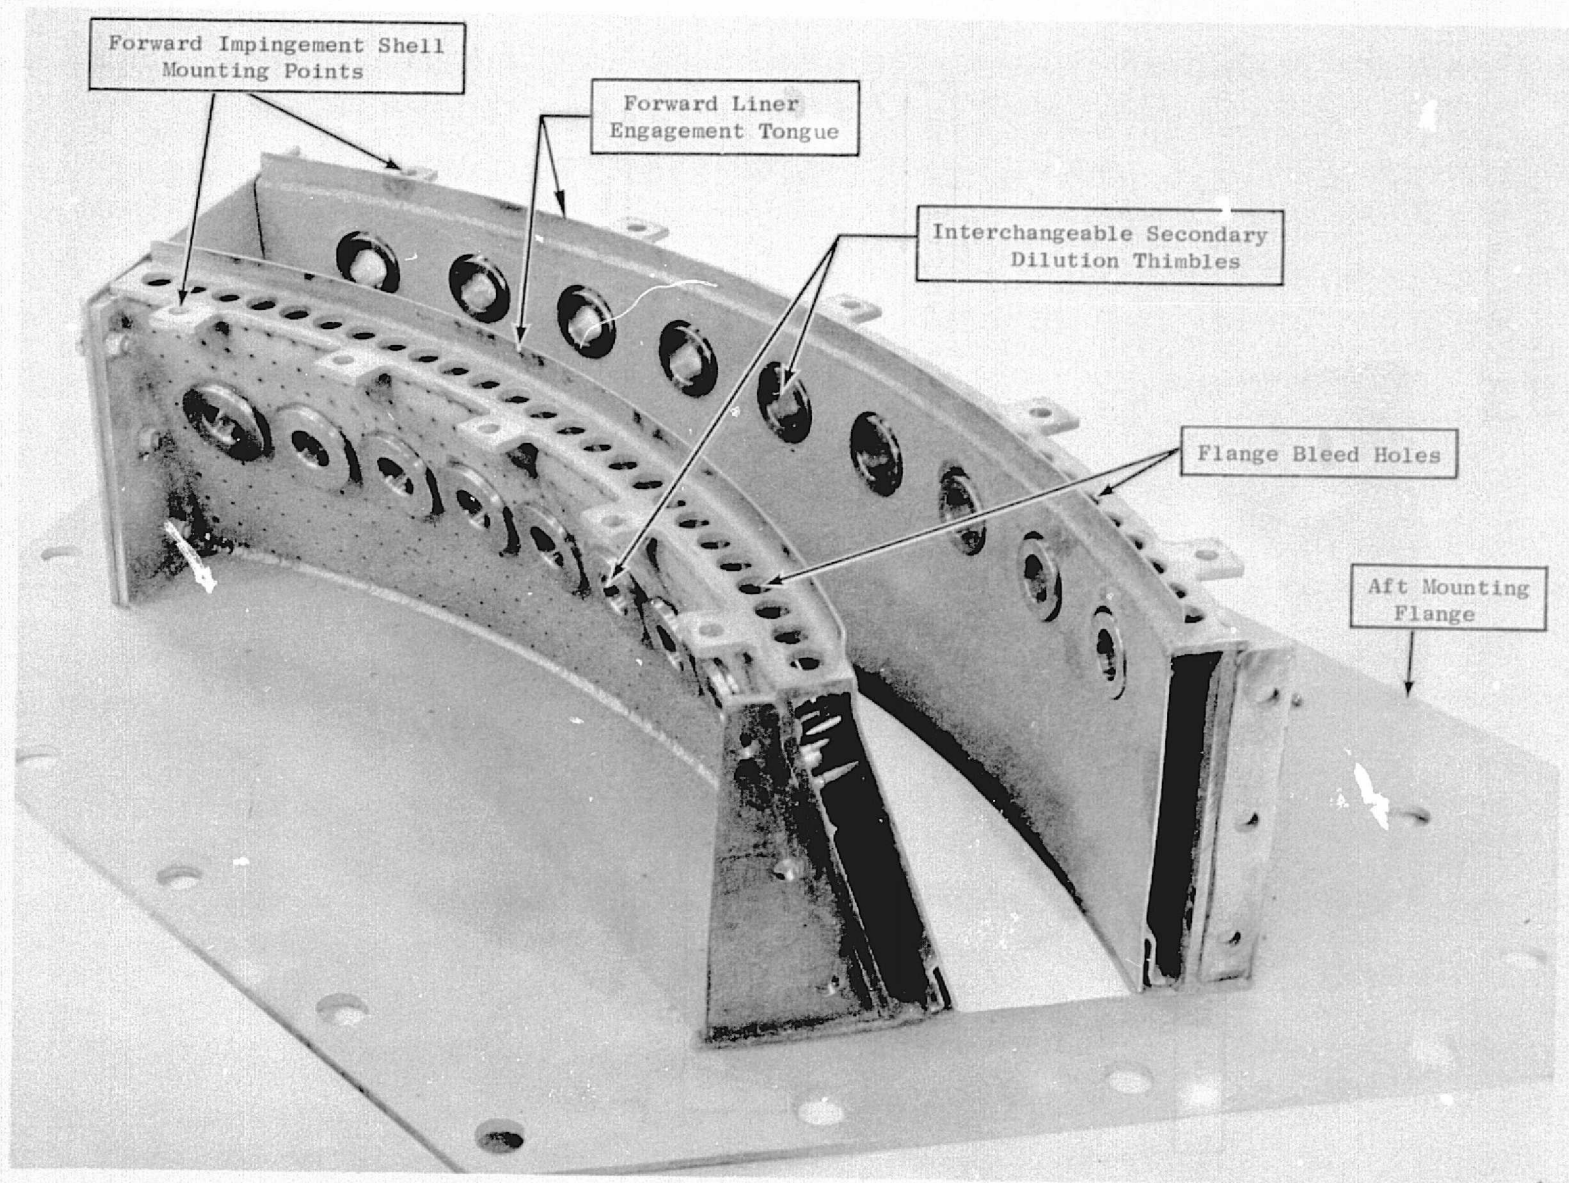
Common Combustor Aft Section (Sideplate Removed).
